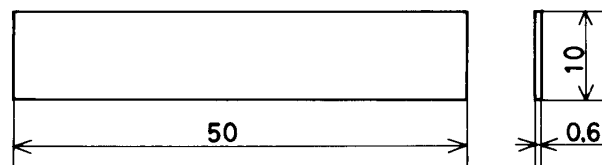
Dimensions (mm) of the specimen for the hardness test
